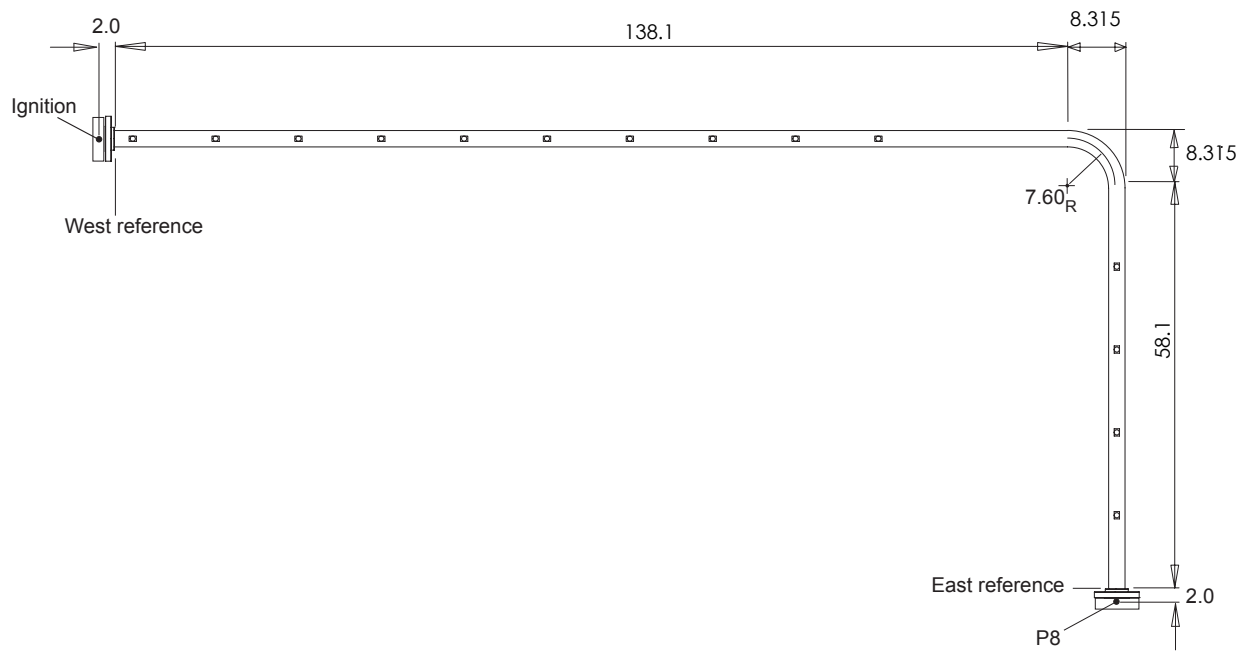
Schematic layout and overall dimensions (inch) of the ES1 specimen constructed from Schedule 40, 304 Stainless steel pipe.
